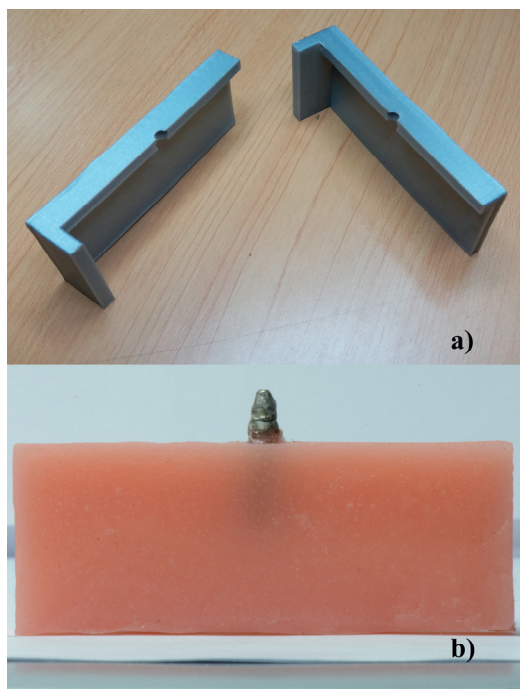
a) 3D printed mold from PLA material; b) hardened model
